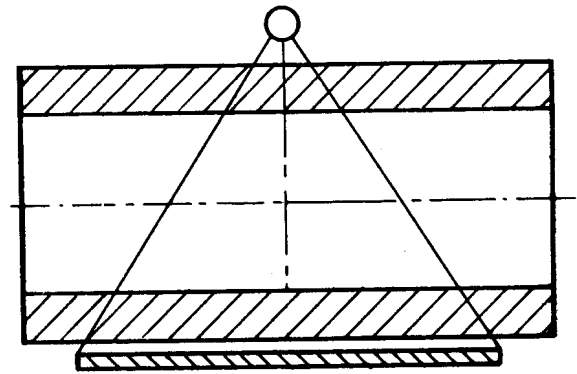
ARRANGEMENT V, DOUBLE WALL PENETRATION, SINGLE WALL EVALUATION, SOURCE AND FILM OUTSIDE, BECAUSE THE SOURCE IS CLOSE TO THE UPPER WALL, FLAWS IN THIS WALL SHALL NOT BE EVALUATED
